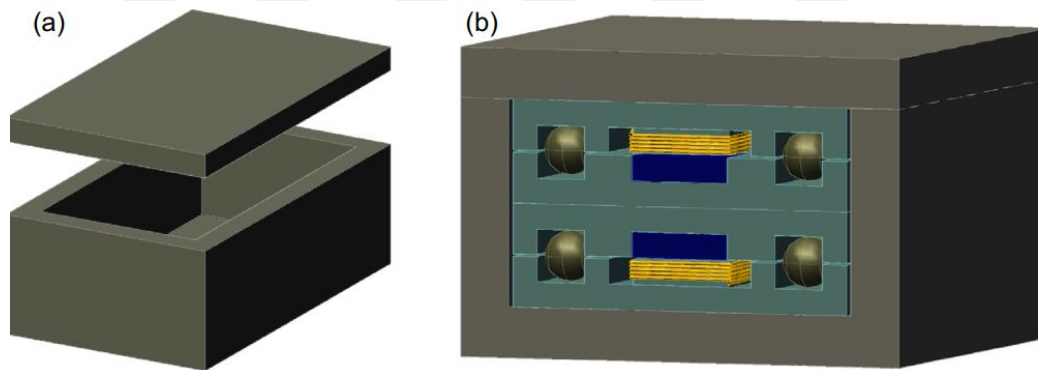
(a) PDMS packaging, (b) cut view of a packaged device.
